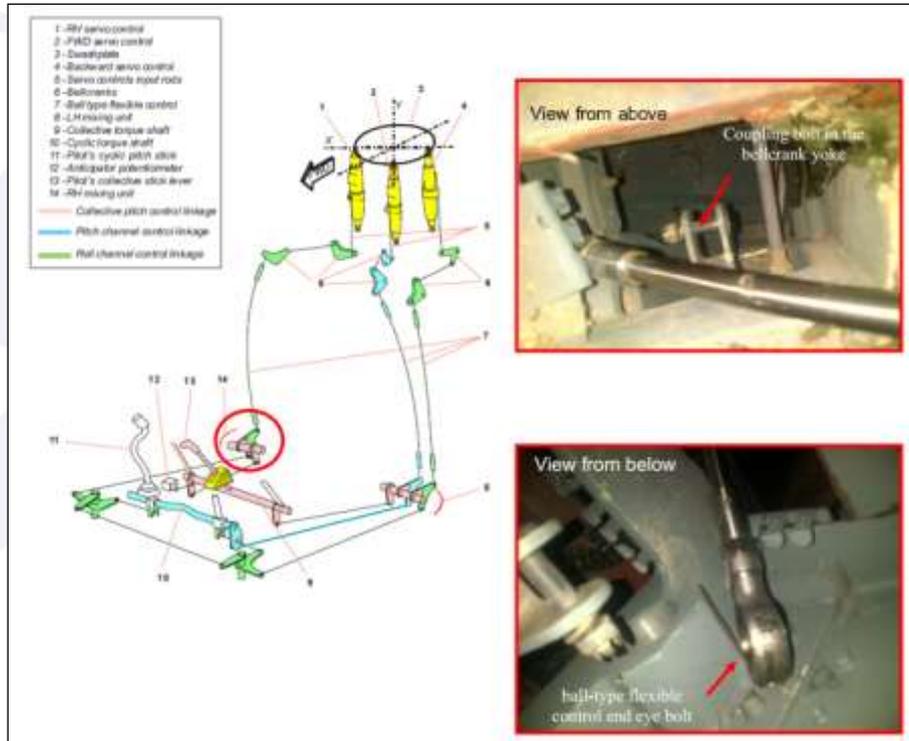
Location and detailed view of the RH roll ball-type flexible control disconnected from the RH roll bellcrank.
